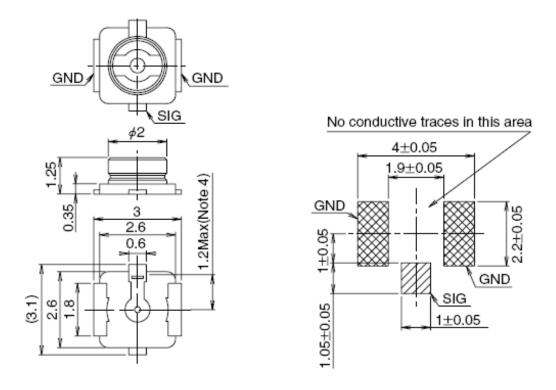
Dimensions of the UF.L-R-SMT Connector (Unit: mm)
